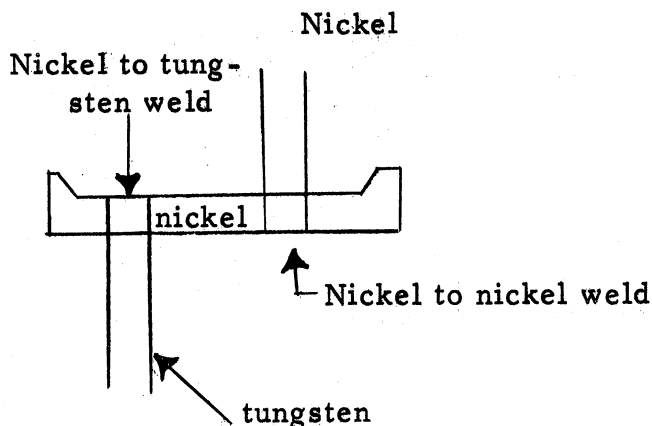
Addition of a nickel bar to make tungsten to nickel weld at a more accessible location
